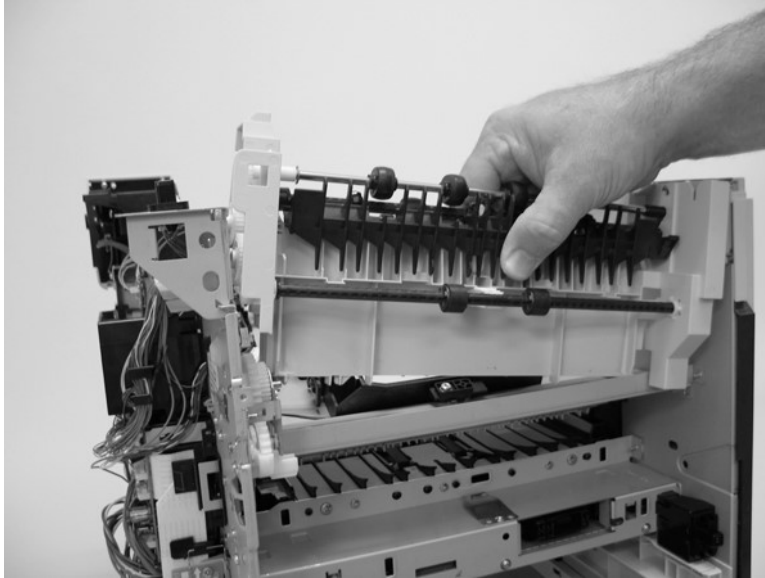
Remove the paper-delivery assembly (3 of 4)
